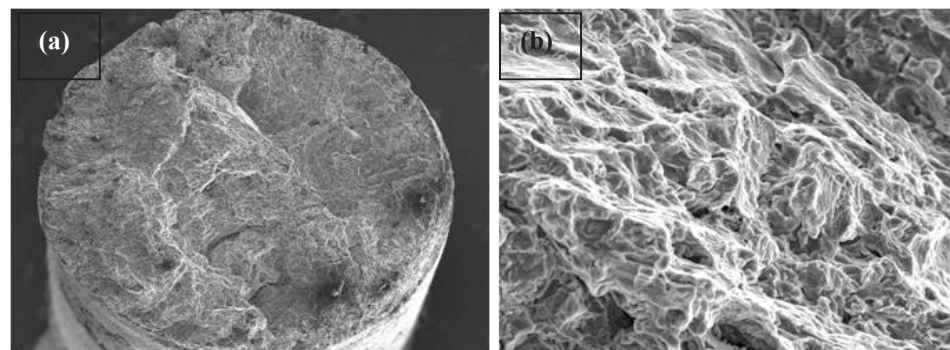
Fractograph of specimen failed in *m*-SBF at strain rate $4.3 \times 10^{-7} \text{ s}^{-1}$: (a) overall fracture surface of specimen, (b) fractograph revealing mechanical overload failure (ductile dimples)
